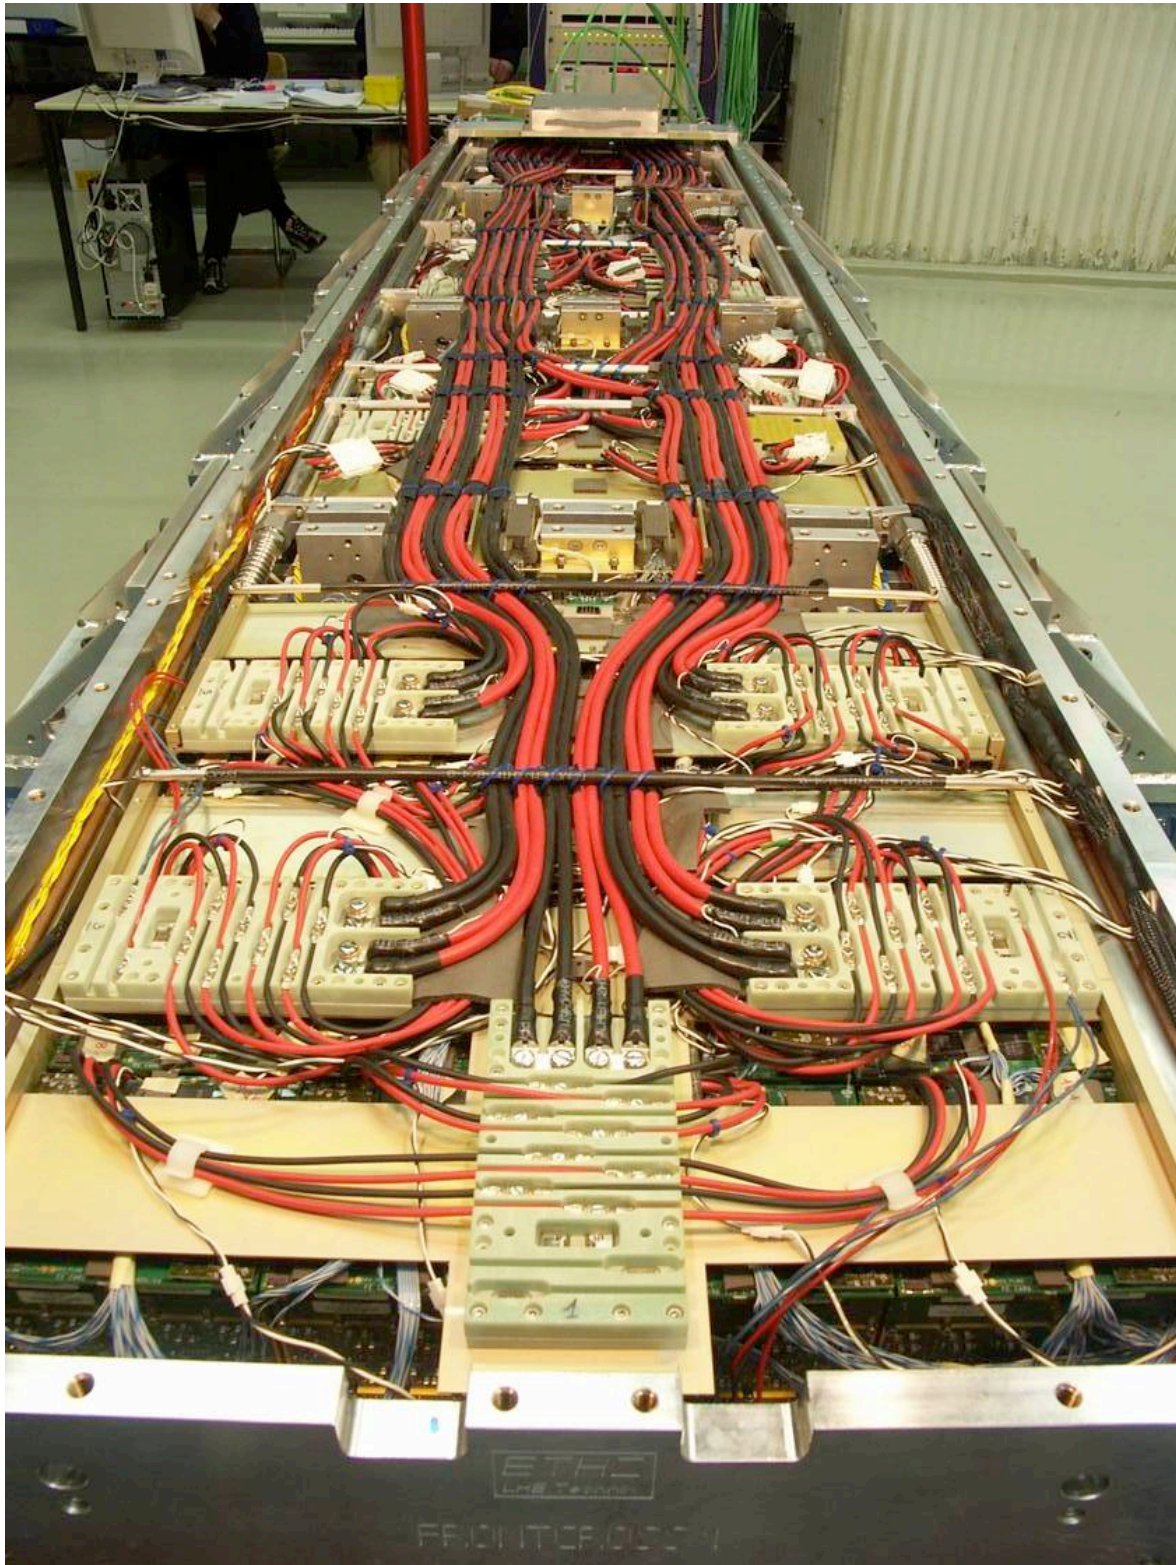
The back of an ECAL supermodule fully equipped with cooling pipes and electronics, before installation of the closing backplate.
